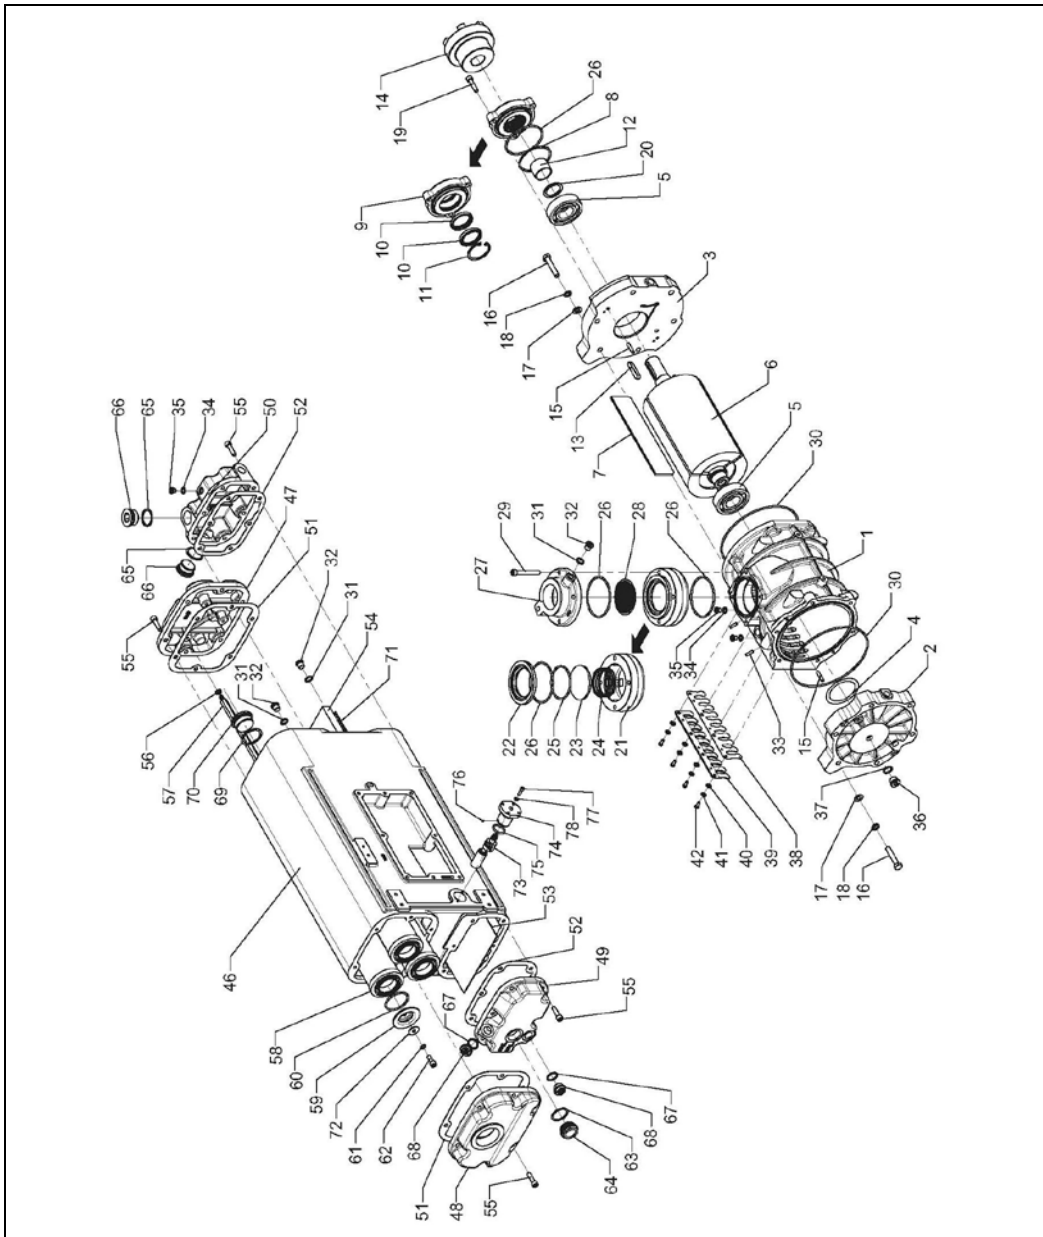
MS-301 Pump parts – Exploded View (2 of 2)
